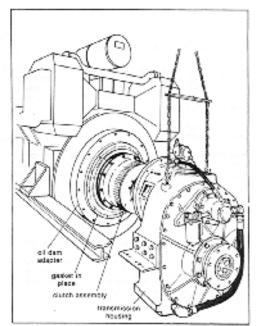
Locating Transmission Housing on Oil Dam Adaptor
